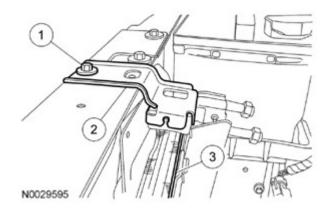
Identifying A/C Condenser Brackets, A/C Condenser Core And Bolts Courtesy of FORD MOTOR CO.
